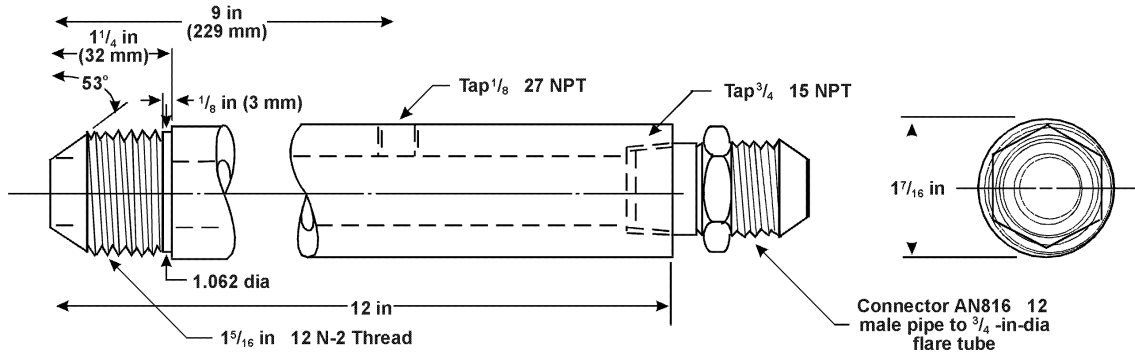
Btu Heat Transfer Device—Inlet Tube
